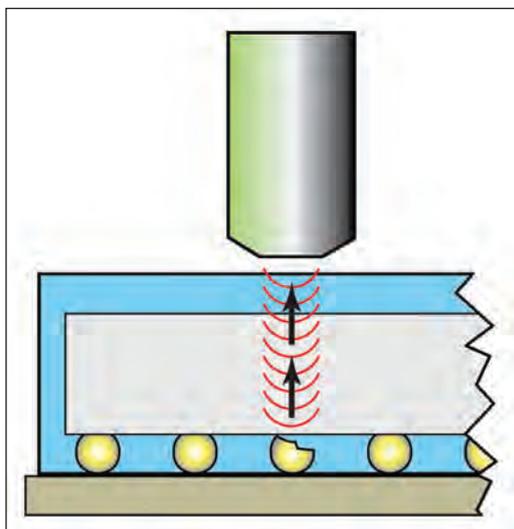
Ultrasound (red) pulsed into a molded underfill flip chip must travel through the attenuating underfill (blue) to image the solder bumps
